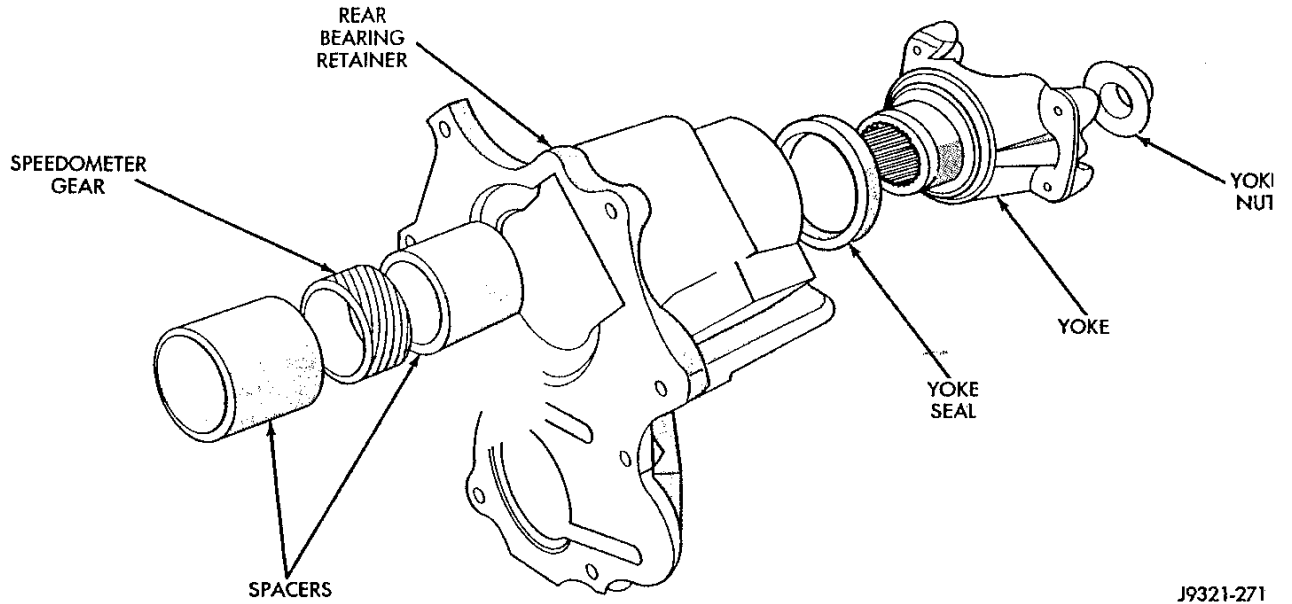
Two Wheel Drive Rear Bearing Retainer And Speedometer Gear Removal
